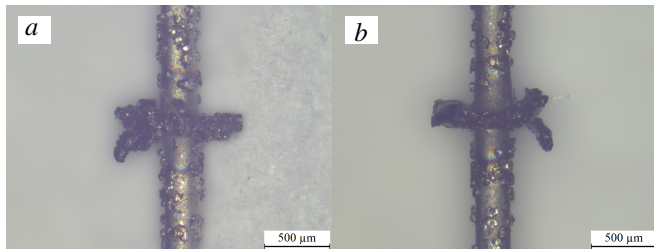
Pictures of welded joint taken in two positions out-of-phase by a 90° rotation.
